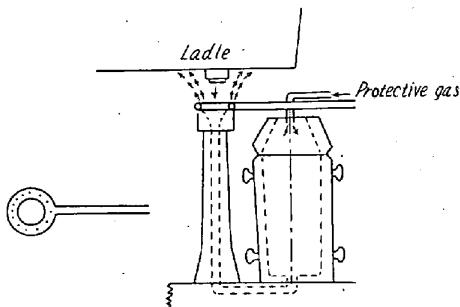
Assembly of bottom teeming in the protective atmosphere.
